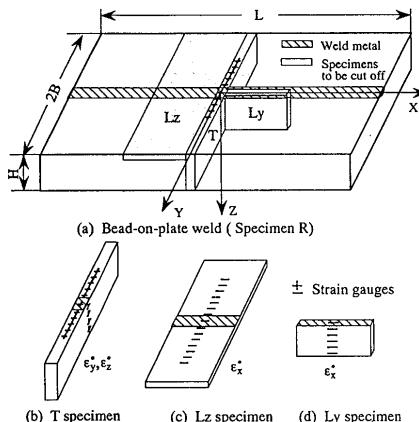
A bead-on-plate weld and specimens used in TLyLz-Method and T-Method
